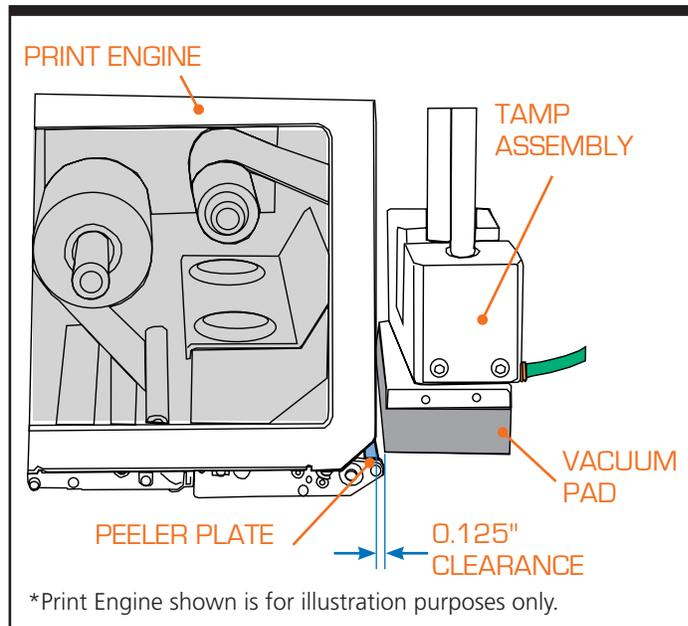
Tamp Clearance (Peeler Plate and Vacuum Pad)
